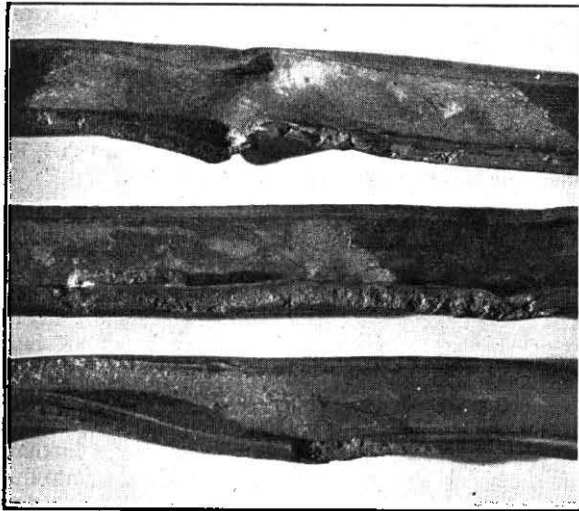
EXAMPLE OF RED LEAD EXTRUDED IN THE SHEATH OF A CABLE.
